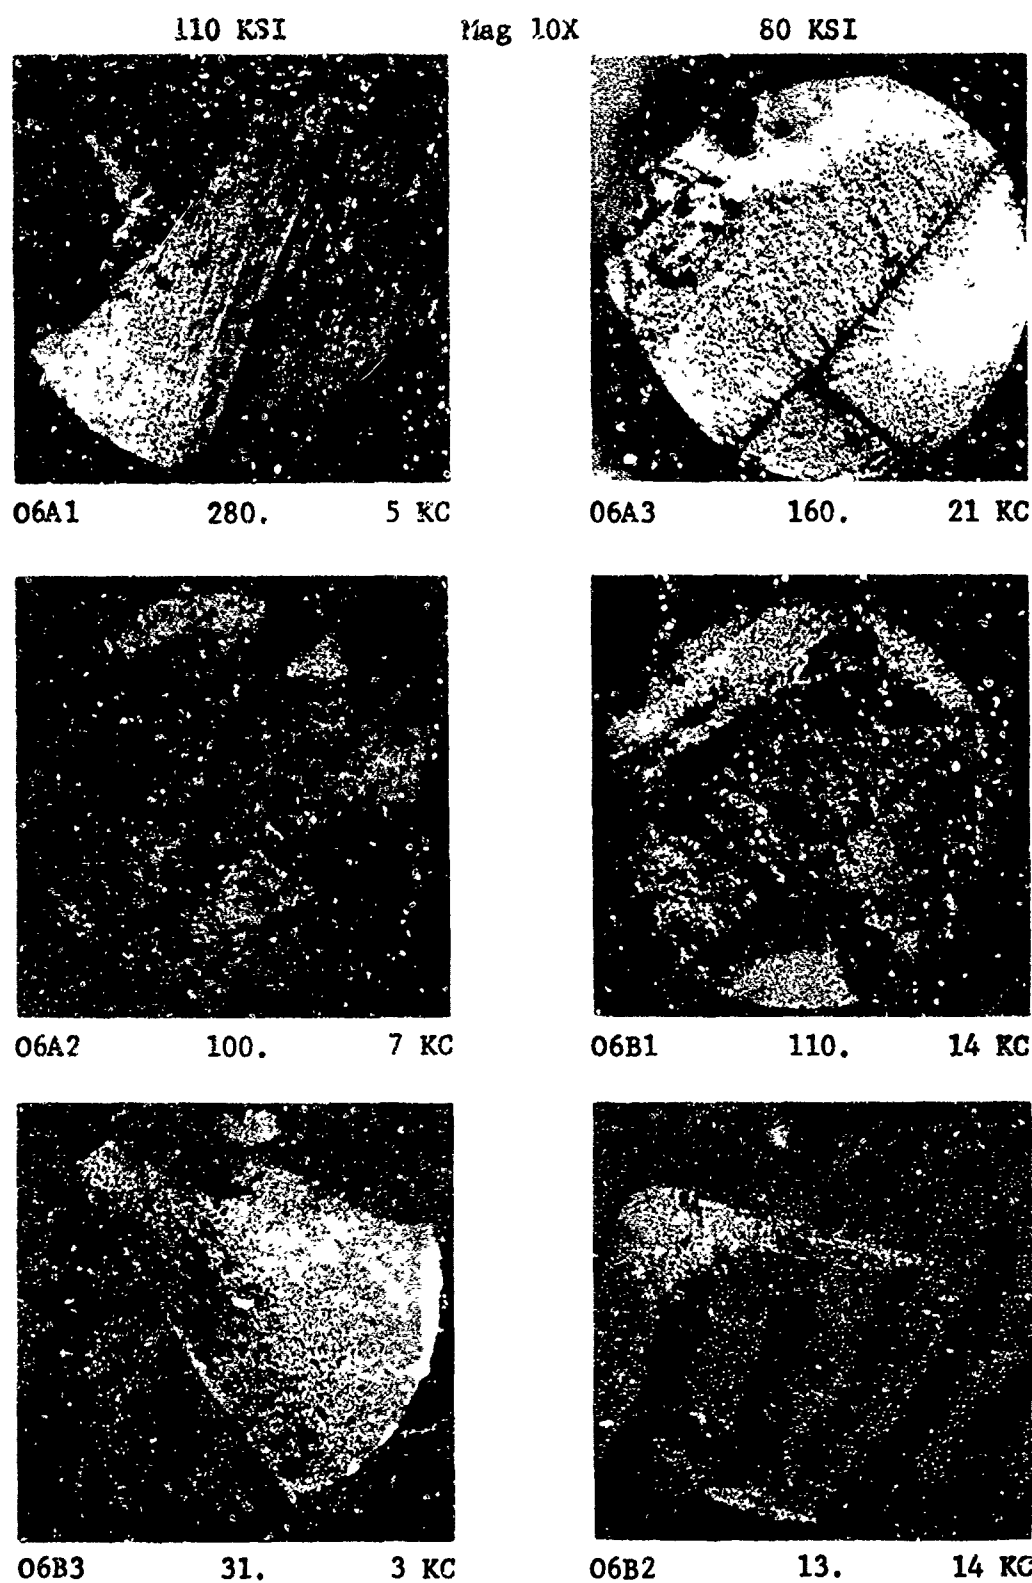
Fracture Surfaces of Failed Fatigue Specimens Series 06-
